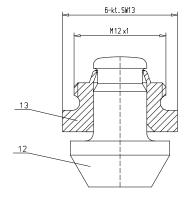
Disc-Ø 8mm PAW 6610.8051
